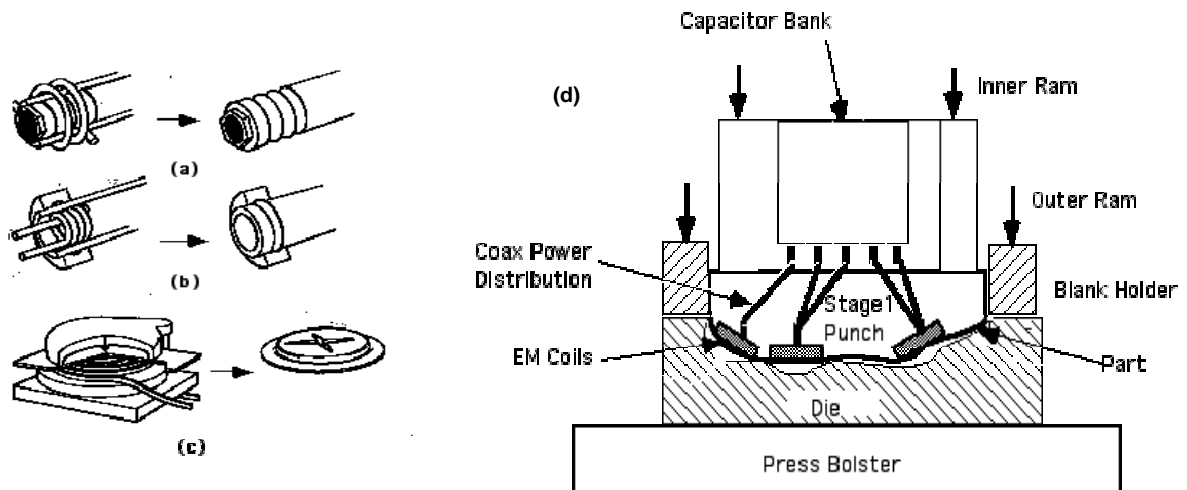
Electromagnetic forming application:(a) tube compression [42]; (b) tube expansion [42]; (c) sheet or pan forming [42]; (d) Matched tool-electromagnetic hybrid sheet forming [25]
